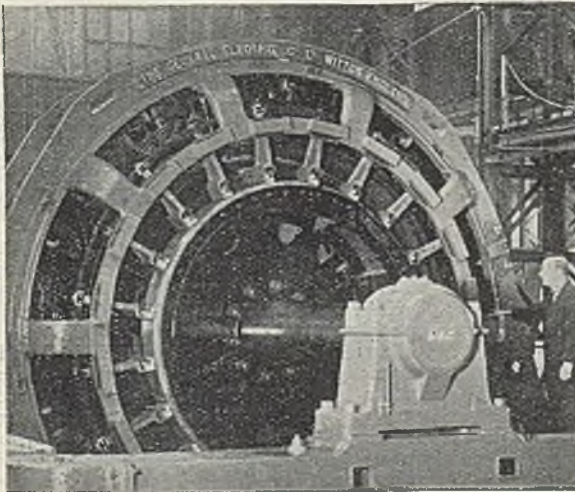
Commutator and brushgear of a 2 140 H.P. (r.m.s.) 650V, 57 r.p.m. winder motor
